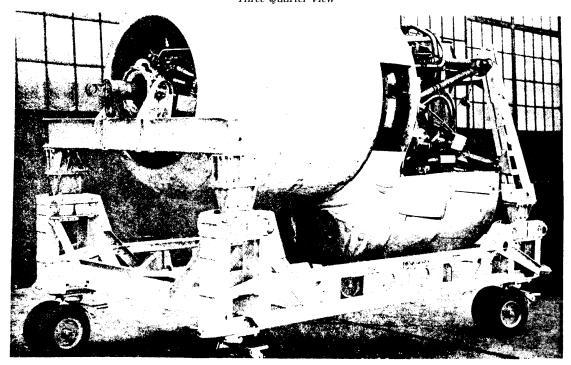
Trailer 55J9109 with KC-97 Power Package Installed, Left Front Three-Quarter View
